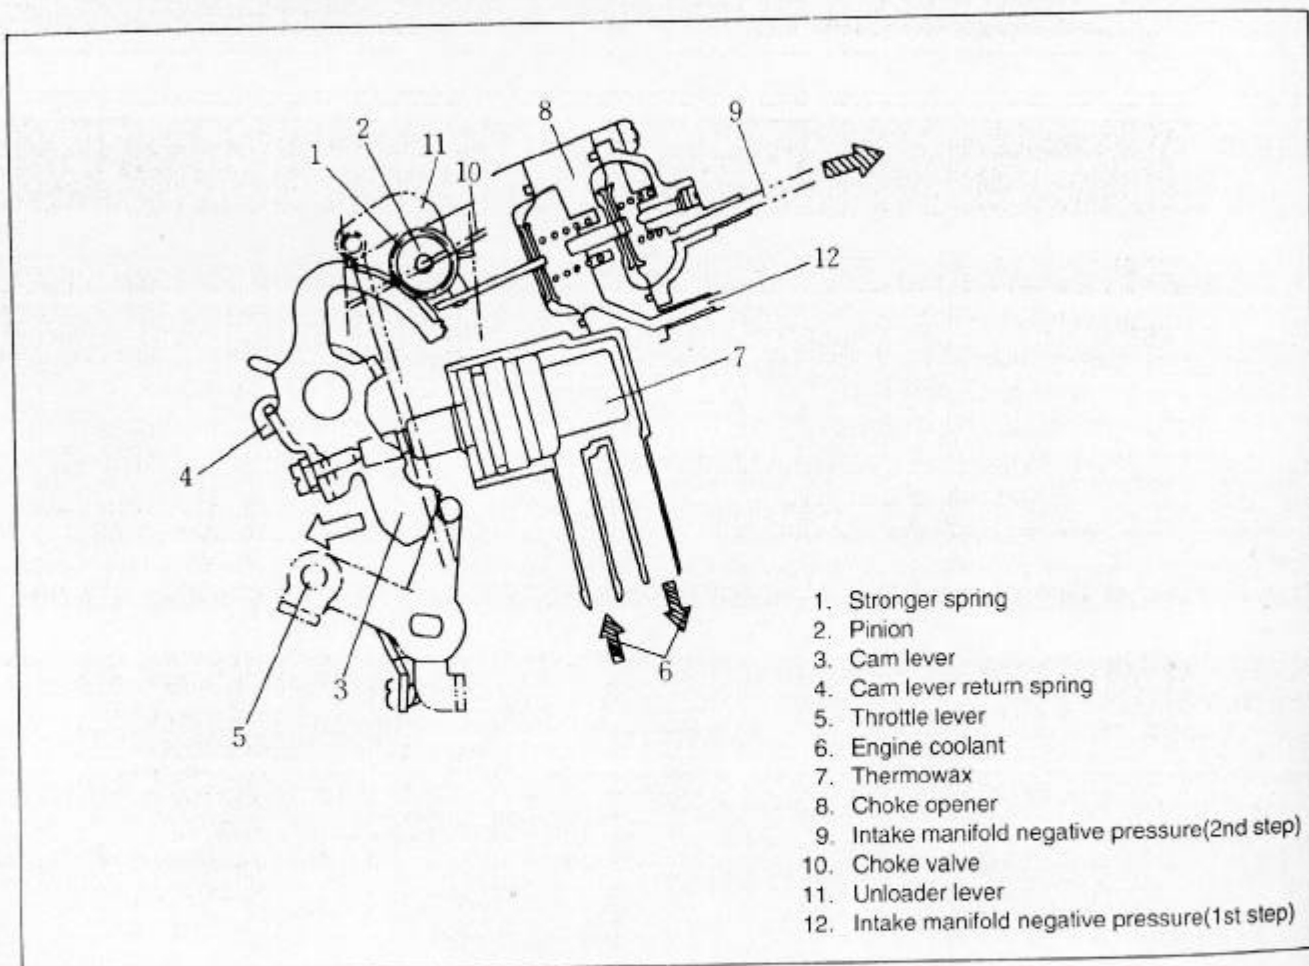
D — 17 OPERATION OF AUTO CHOKE SYSTEM
